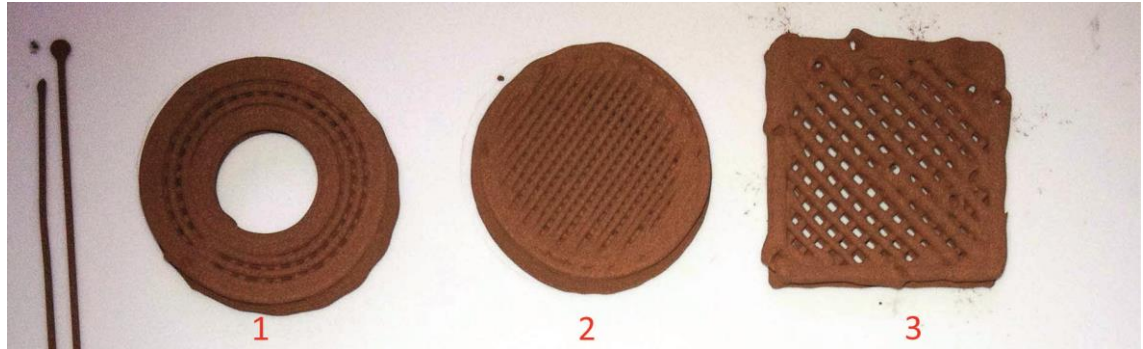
, BronzClay samples, 1: Jar tube tool-path, 2: Jar bottom tool-path, 3: 45° coarse tool-path. figure by author
